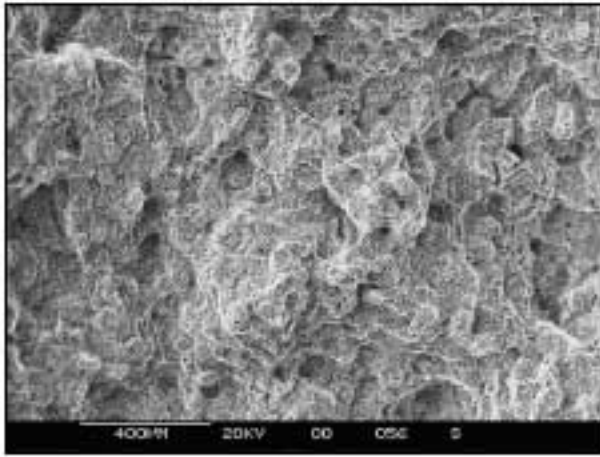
Fracture morphology of specimens after treatments: 4h at 520 °C + LHIP + ageing
